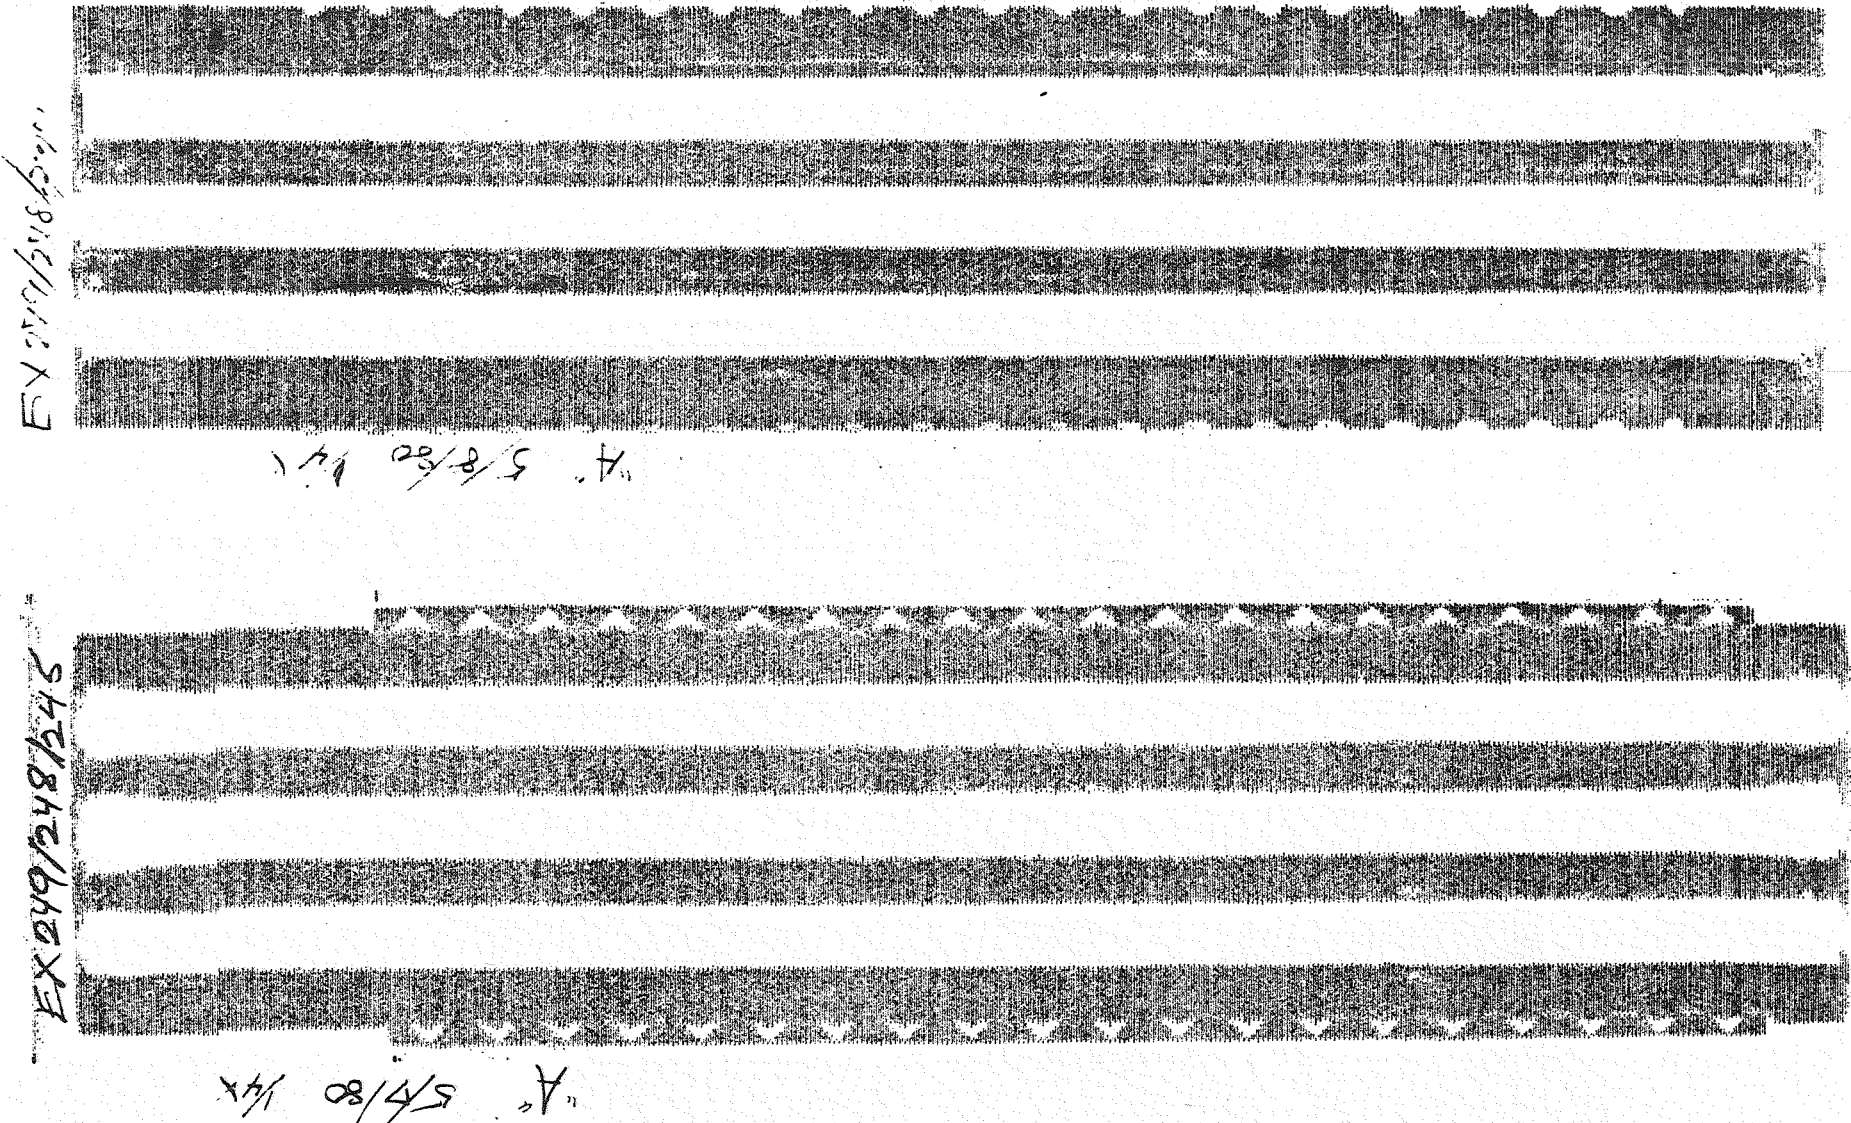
C-Scans of Stringer to Skin Bond Joints, Panels EX249/248/245 and EX279/278/277
